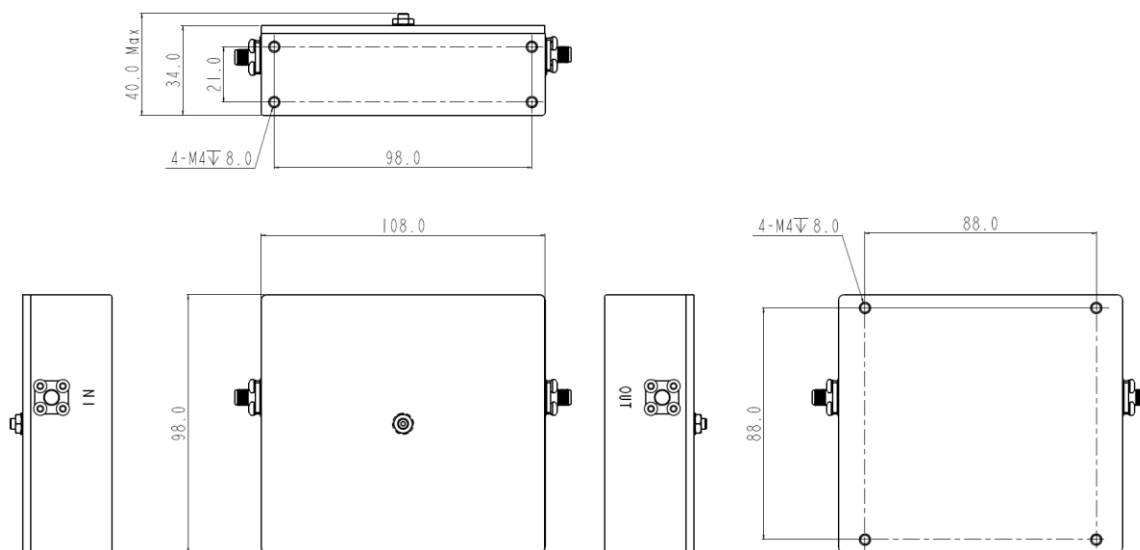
JX-CF1-2570M2615M-20S Filter front panel layout
